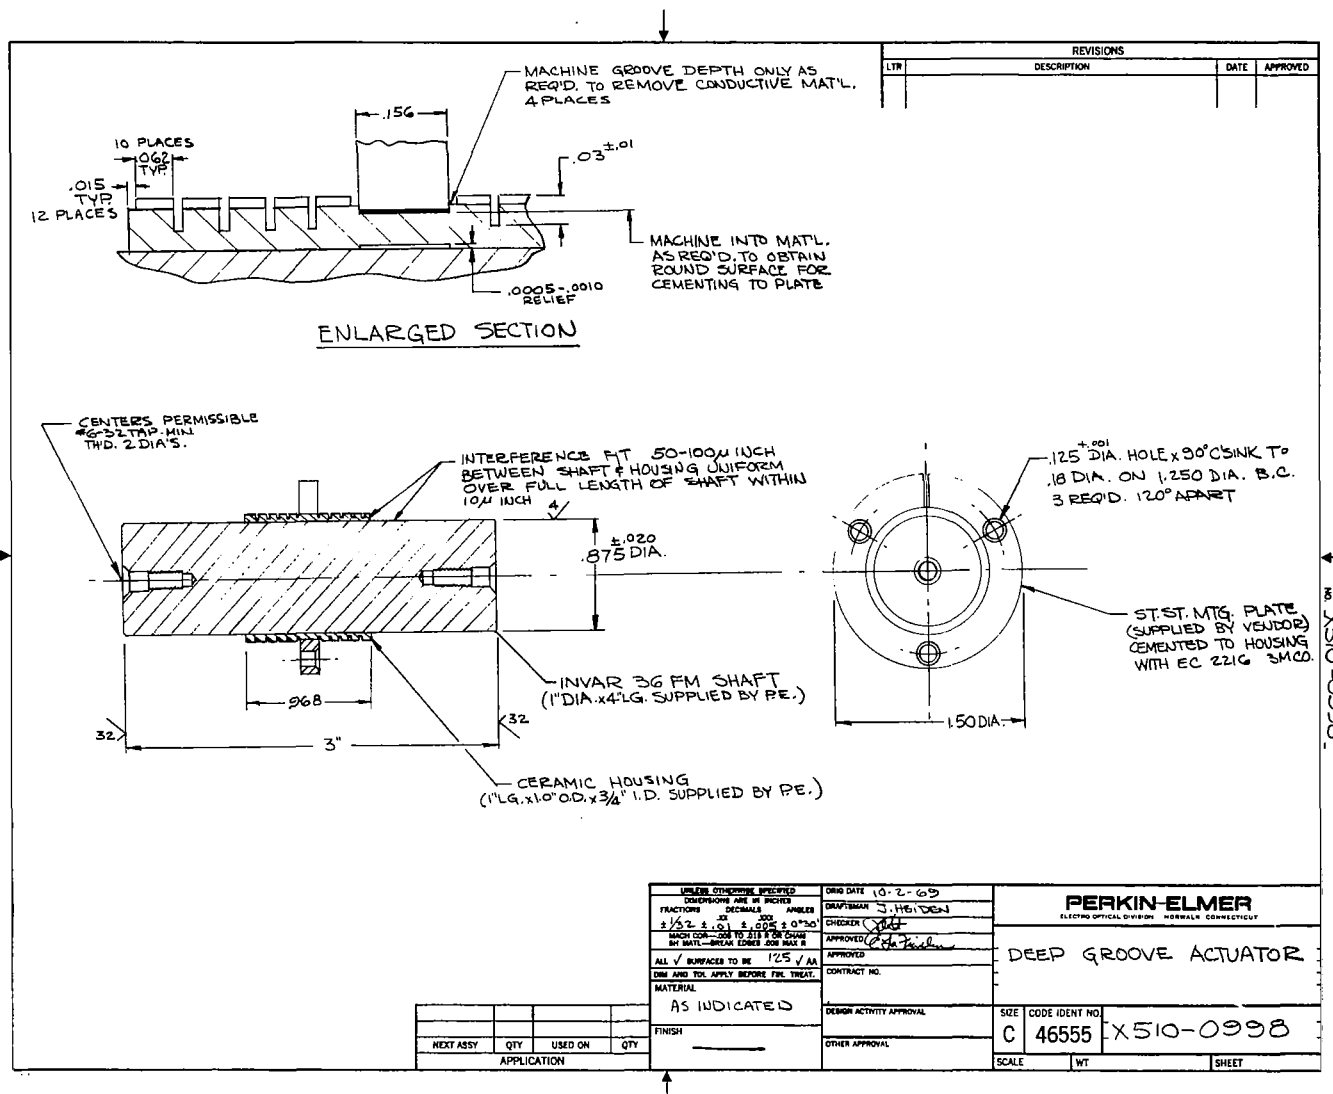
Test Actuator Assembly No. 1 (10 Electrodes)
